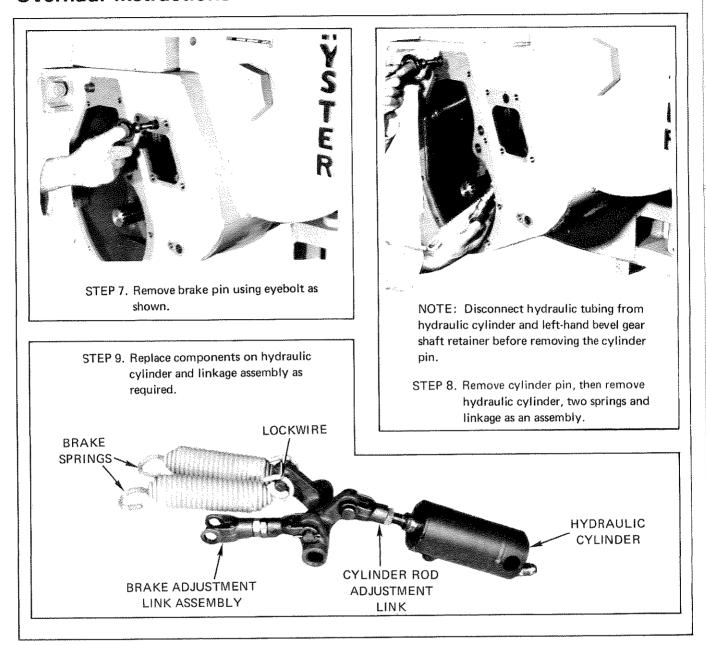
REMOVAL OF HYDRAULIC BRAKE ASSEMBLY, POWER CONTROLLED WINCH (Sheet 2 of 2)
